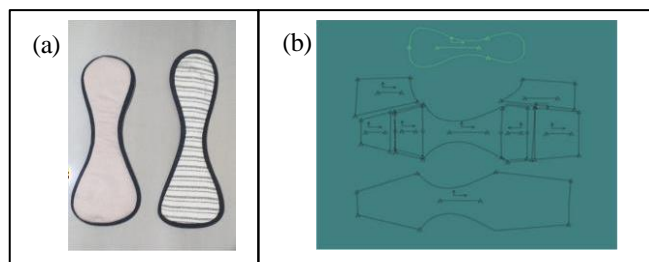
(a)Pad construction (b)Marker of the undergarment – Gerber Accumark technology
